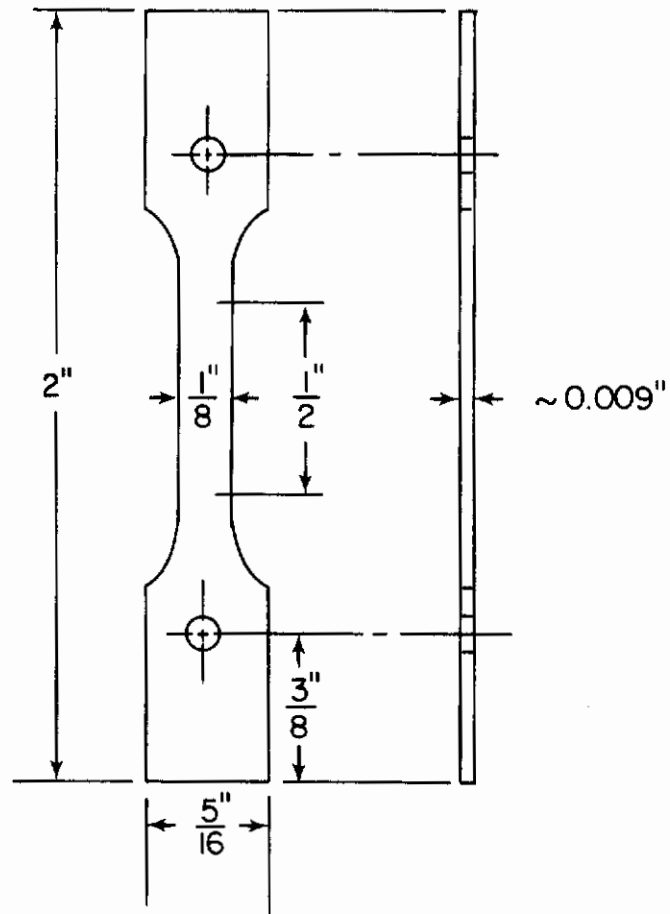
Dimensions of Tensile Specimens Used in Stress Corrosion Tests
